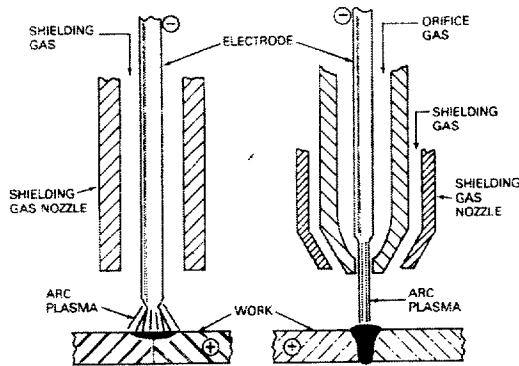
Comparison of TIG welding and plasma arc welding process
